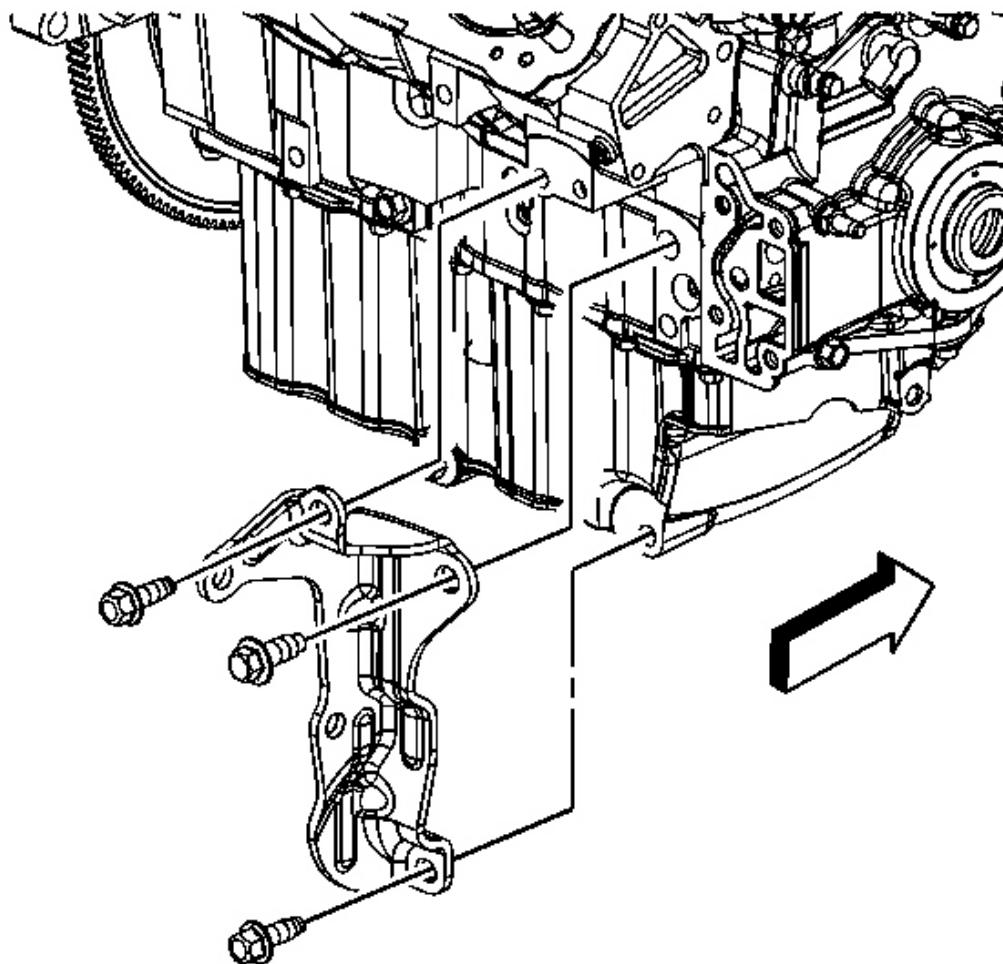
View Of Engine Mount Bracket & Bolts
